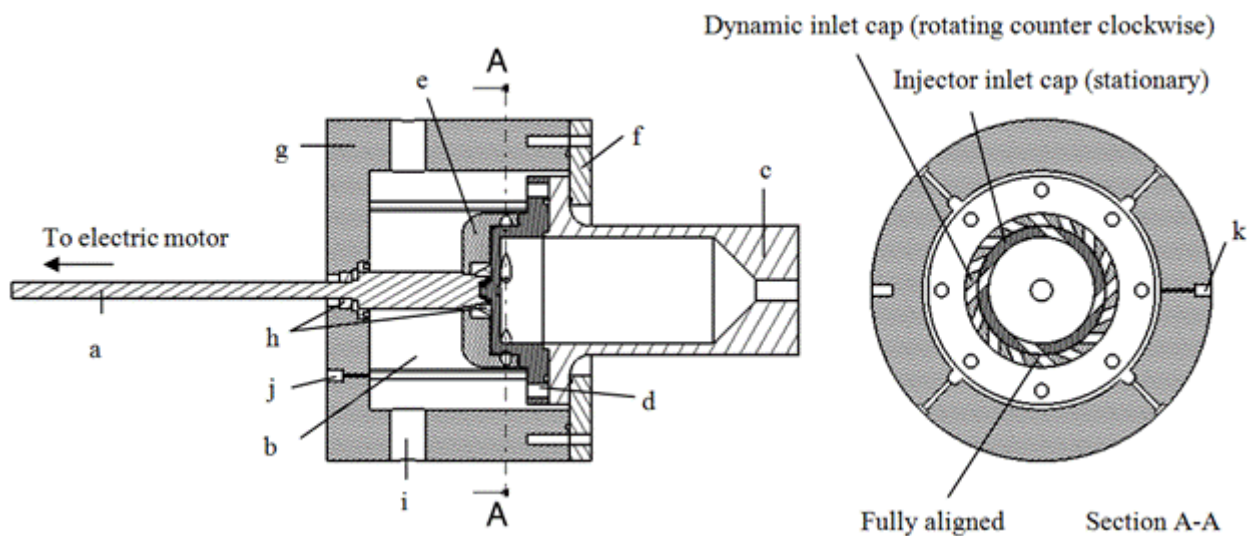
Left - Schematic drawing of swirl injector pulsator: a) shaft, b) vanes, c) swirl chamber, d) injector inlet cap, e) dynamic inlet cap, f) manifold cap, g) manifold, h) bearings, i) water supply inlet, j,k) pressure transducer taps. Right – View of cross section A-A, where holes of the dynamic inlet cap and injector inlet cap are aligned.
